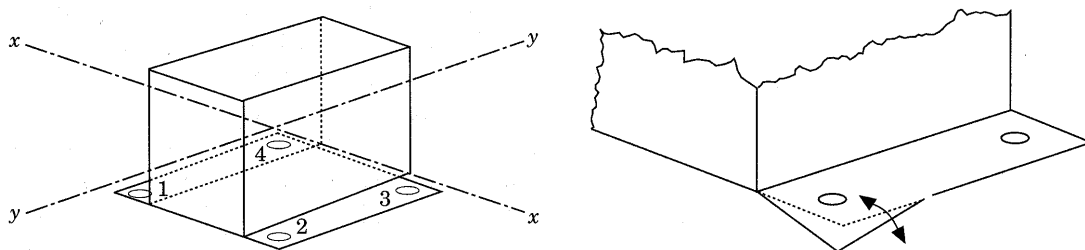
Machine with cantilever flanges (left) and local plate deformation [15].
